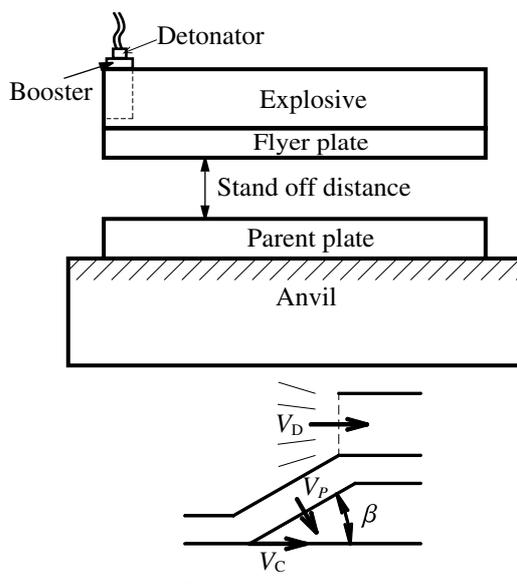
Schematic of parallel plate configuration of explosive welding and the parameters.
